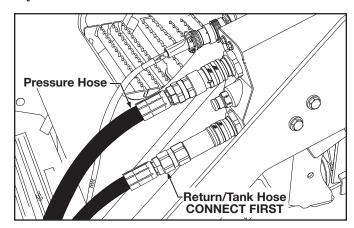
Hydraulic Hose Connections to Skid Steer
